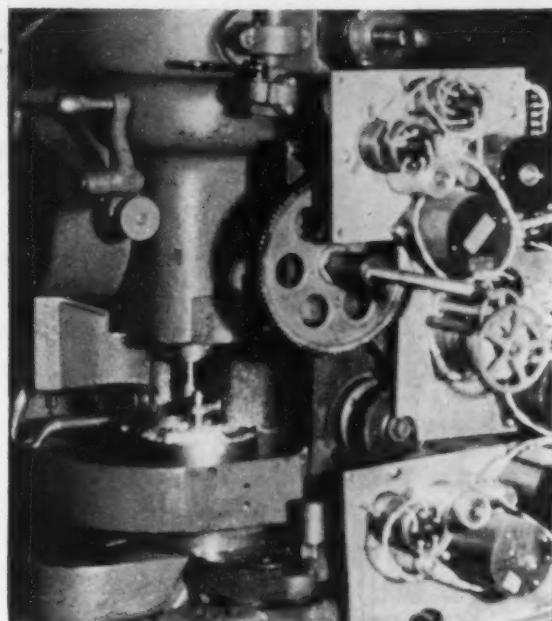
Electrical components attached to gear shaper for automatic operation include servo mechanisms, damping generators and induction motors shown above.
